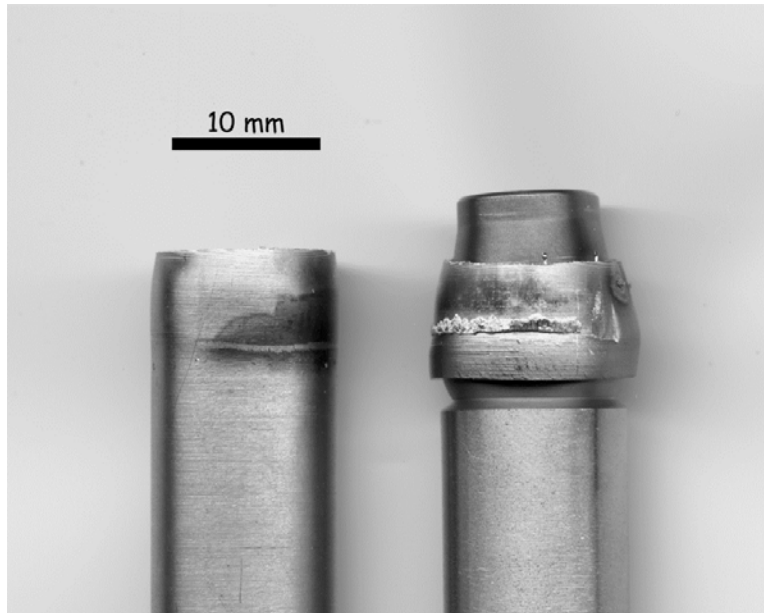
Pressure forge weld in PM2000 material, tensile tested at 900 °C, failure away from weld at load of 1,193 pounds.
